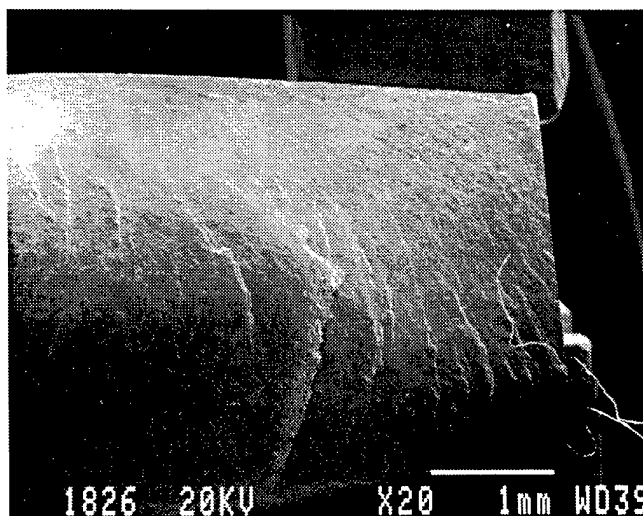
Photograph of bending failed tooth fracture surface. (set "J").
